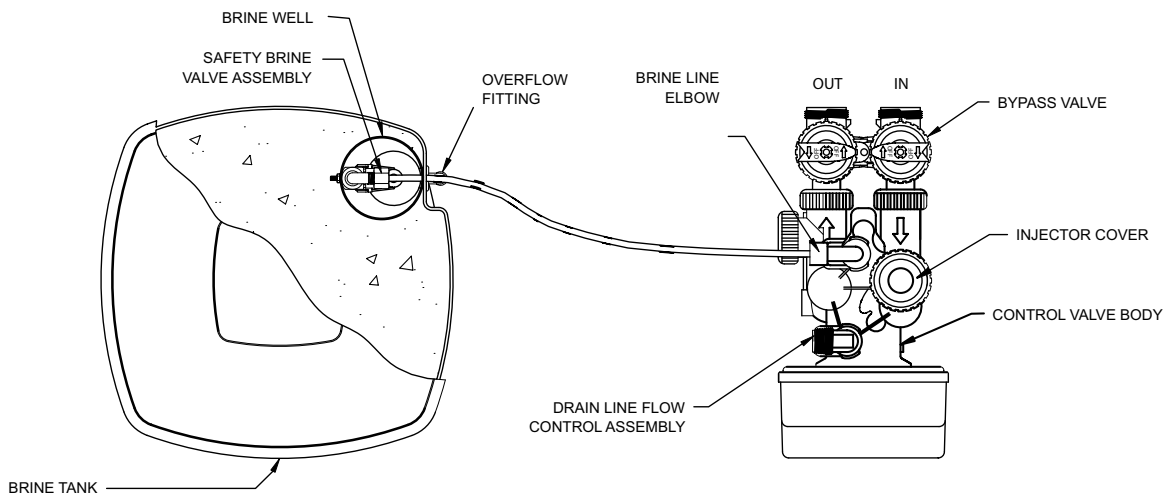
SOFTENER AND BRINE TANK ASSEMBLY, TOP VIEW
